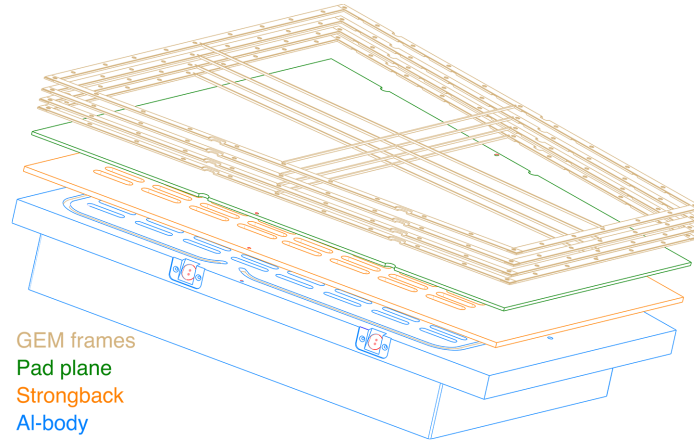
Layout of a TPC IROC, showing the chamber body components and GEM frames [110].
